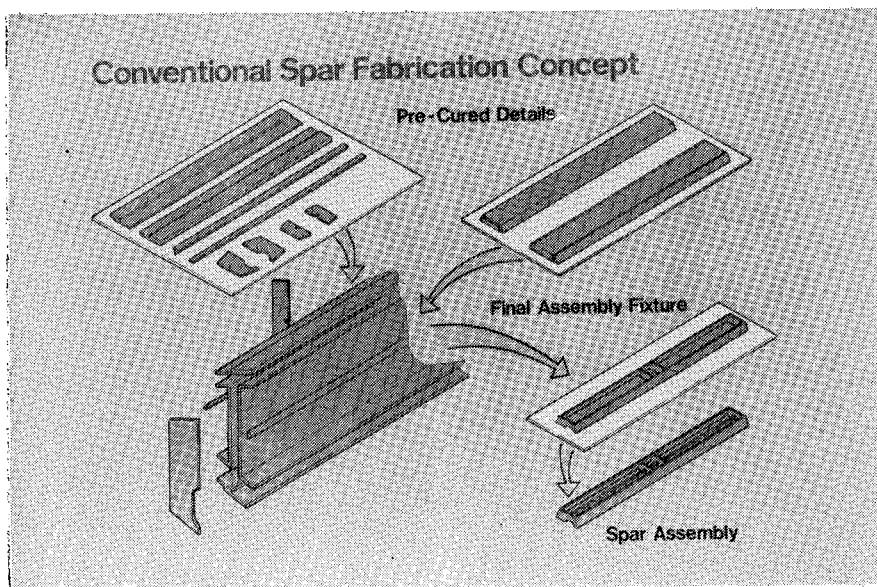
Fabrication and Assembly Sequence for Spar Made by Conventional Method
